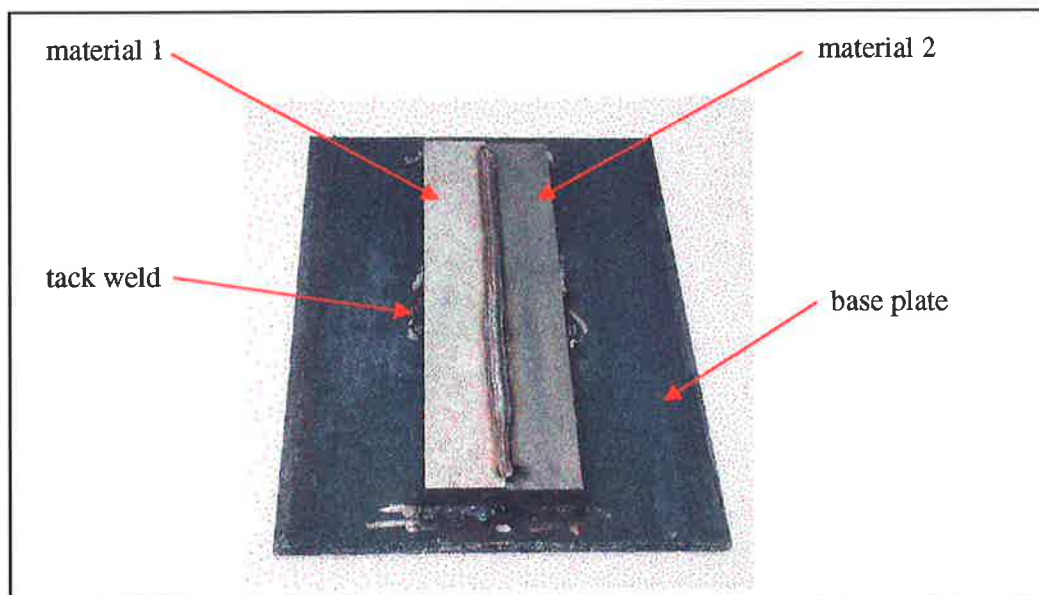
The configuration of a sample in the GTAW welding experiments.
